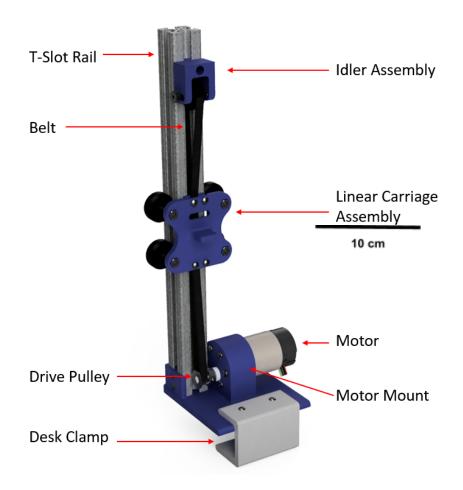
Belt drive haptic module which moves a linear carriage along the vertical axis. The drive pulley and idler assembly tensions the belt on either ends of linear travel. The linear carriage assembly is clamped onto a section of the belt which allows it to move along with the belt.
